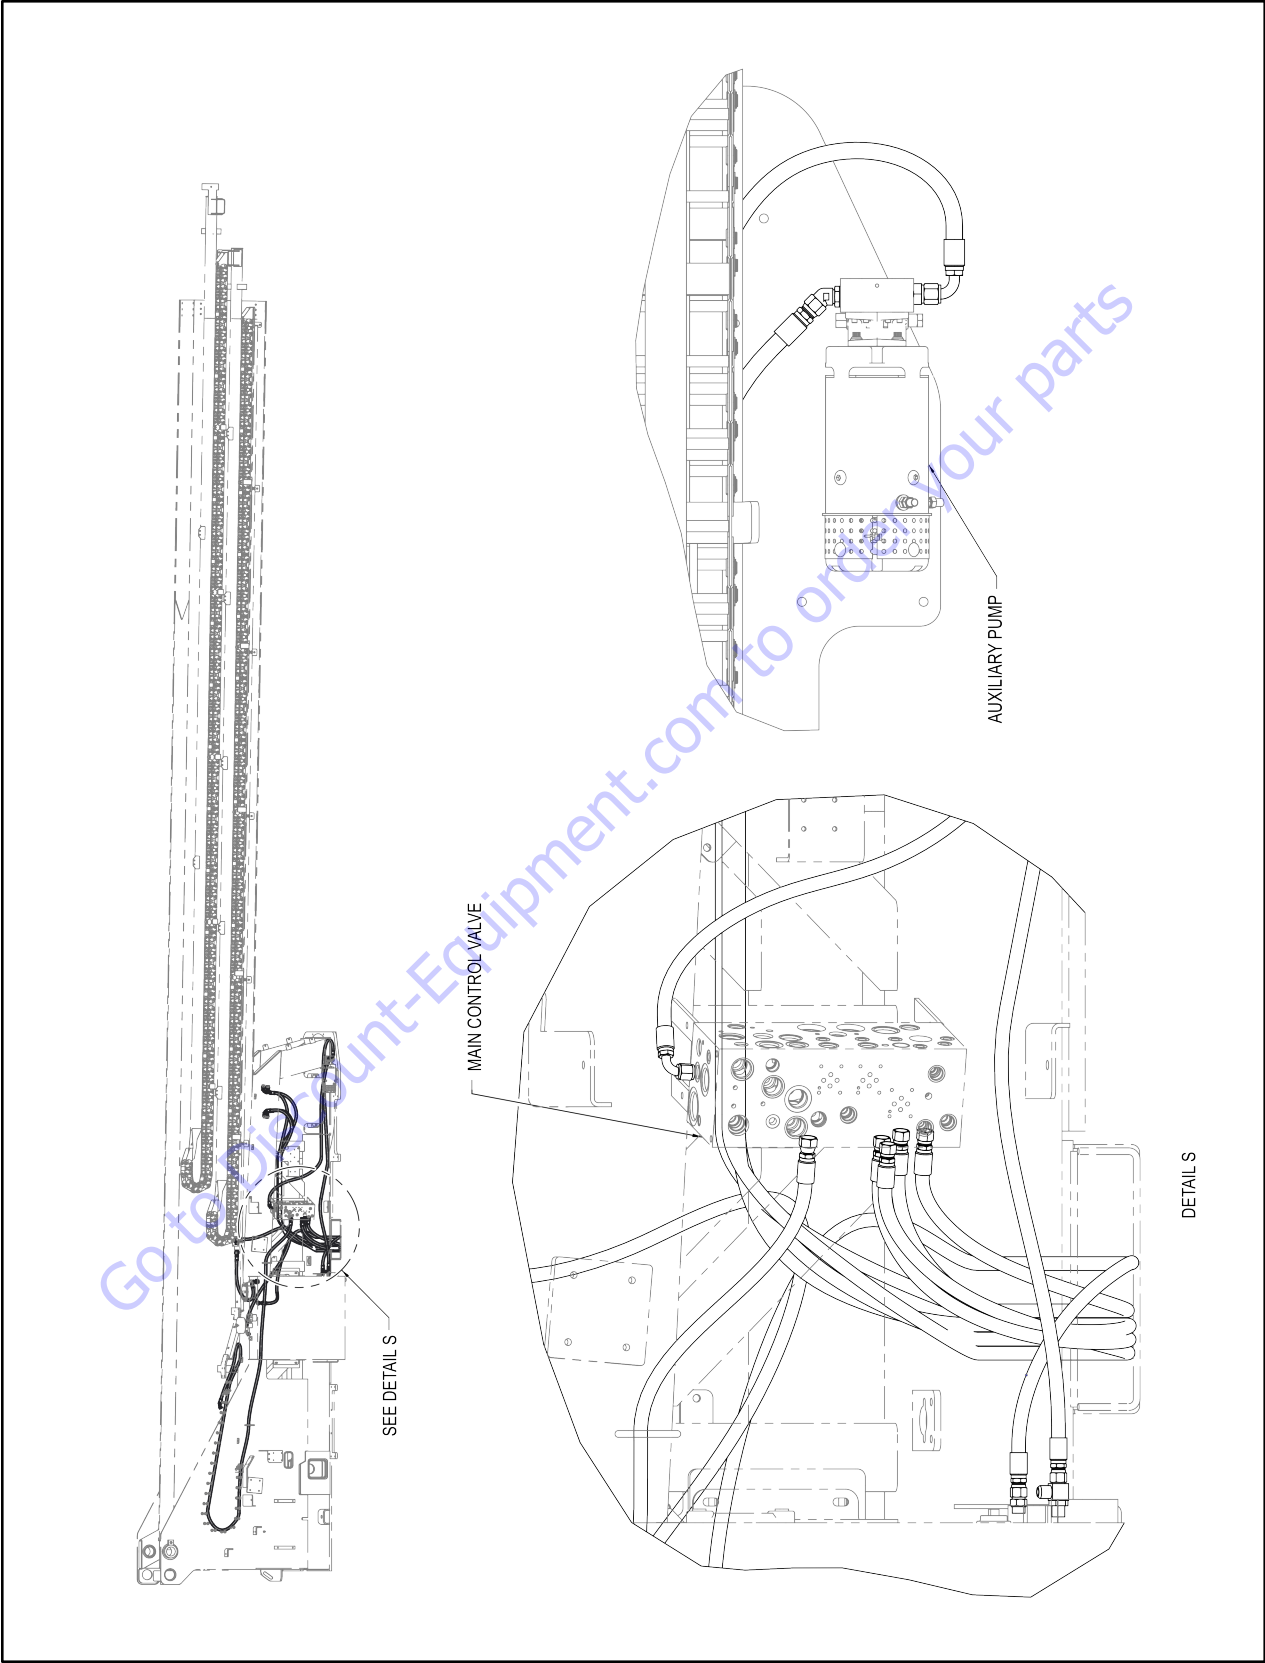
Hydraulic Hose Installation - Sheet 5 of 8
